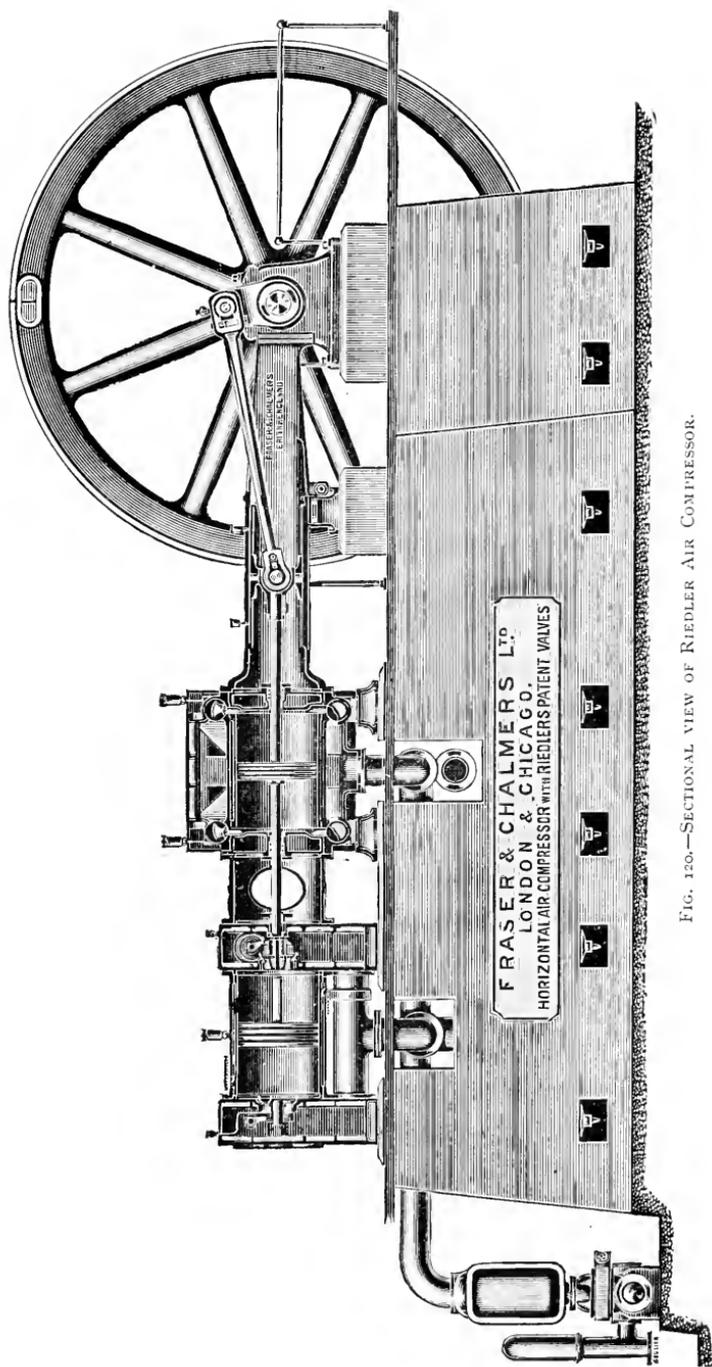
SECTIONAL VIEW OF RIEDLER AIR COMPRESSOR.
